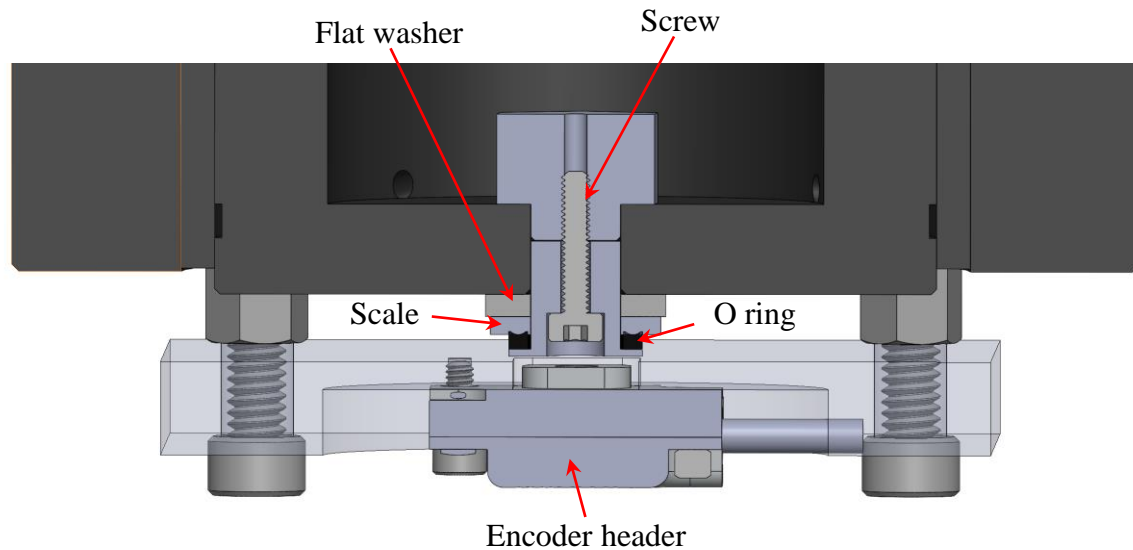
Rotary encoder header and scale are mounted in the stationary and rotary stage of the air bearing separately.
